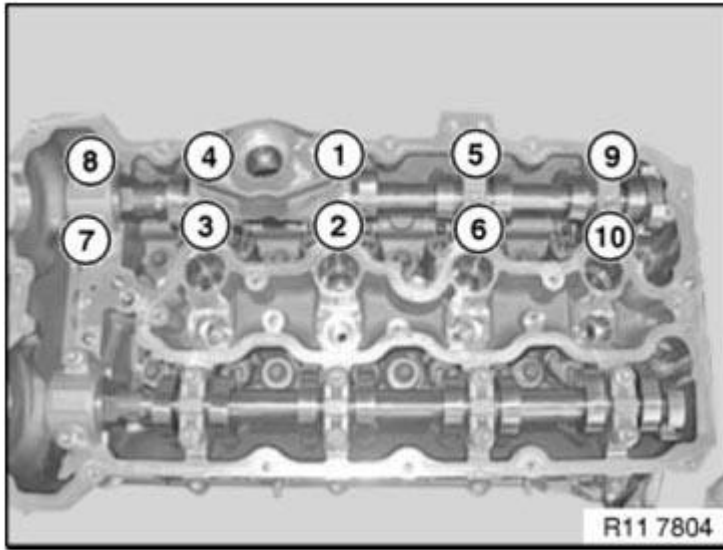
Identifying Camshaft Bearings Bolts Tightening Sequence
